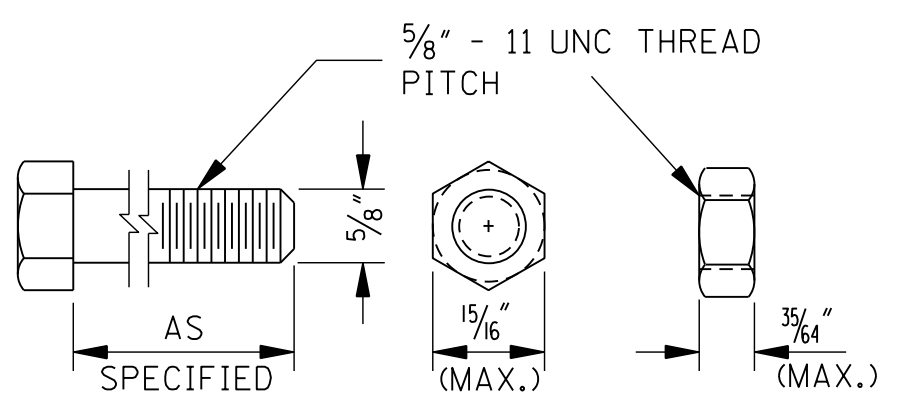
DETAILS OF ADJUSTABLE HEIGHT BLOCKOUT ASSEMBLY
